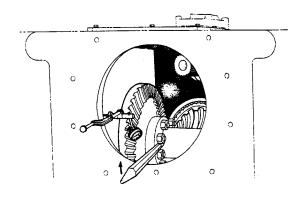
Checking Backlash Between Bevel Gear and Bevel Pinion (T-70855)
